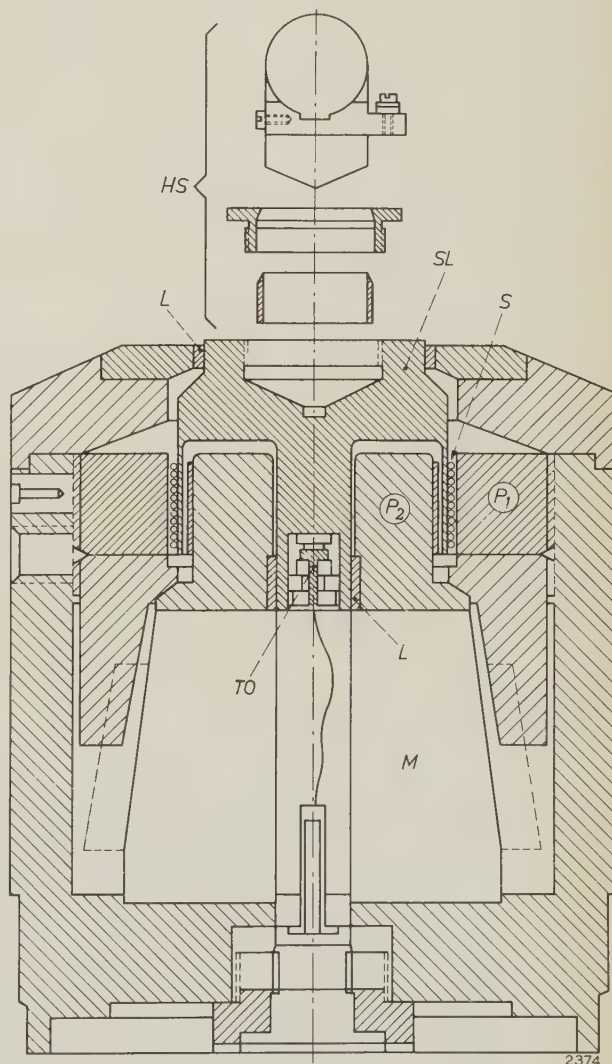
Cross-section of a vibrator for studying microphonic effects in electron tubes. *S* coil, *SL* coil former, *L* sleeve bearings, *M* magnet, *P*₁ and *P*₂ pole pieces, *TO* vibration pick-up, *HS* adaptors for clamping the tube to the coil former.
